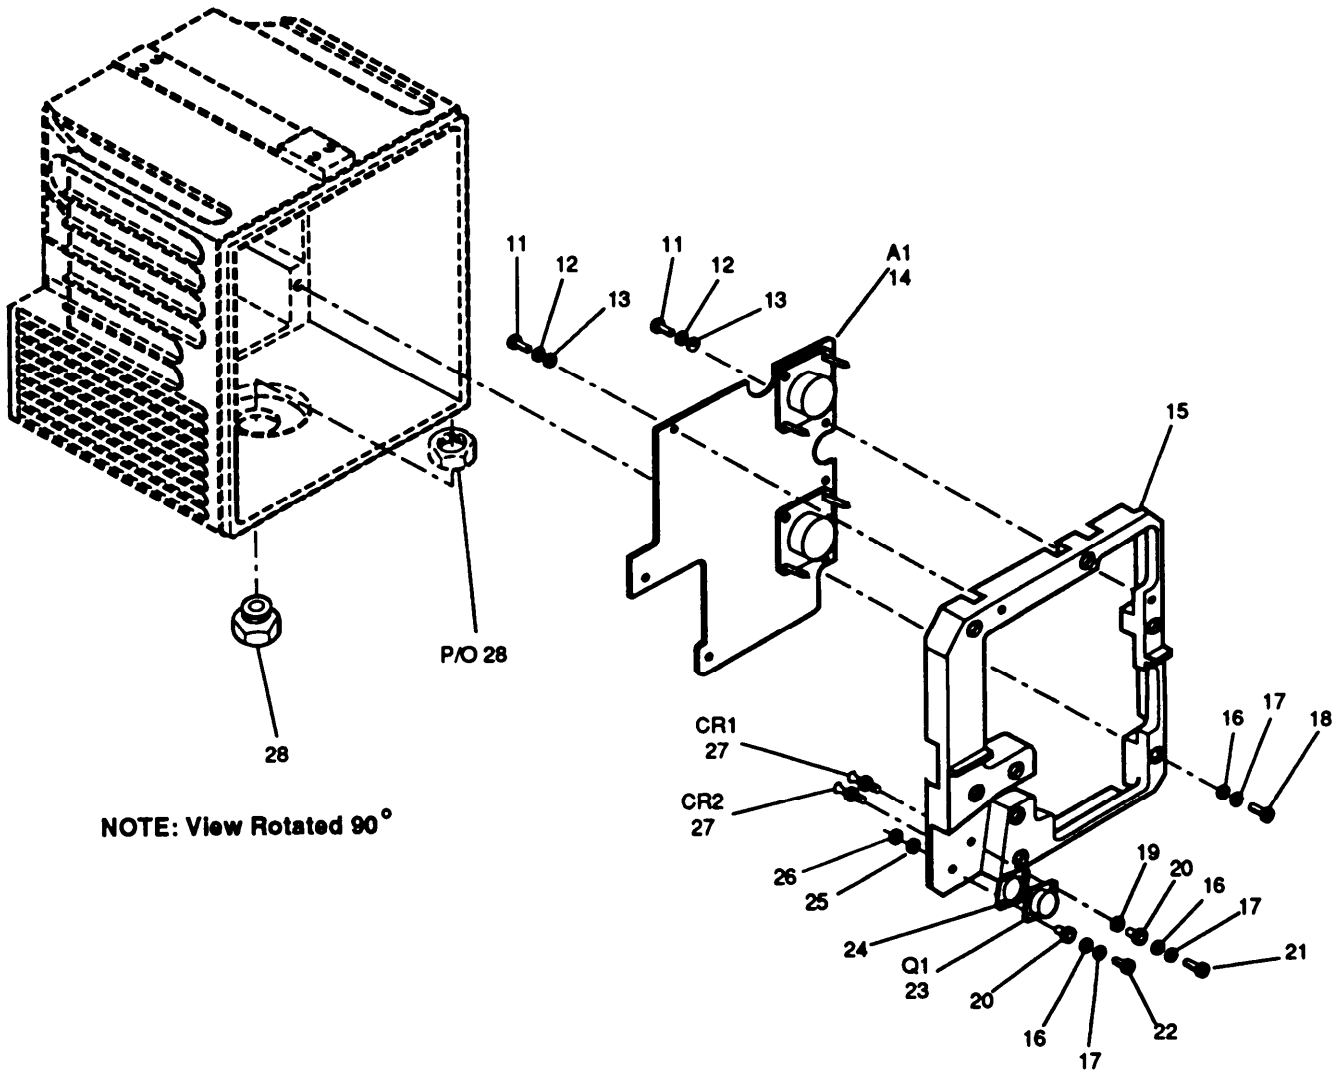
Battery Box Housing Assembly (Sheet 2 of 2)
